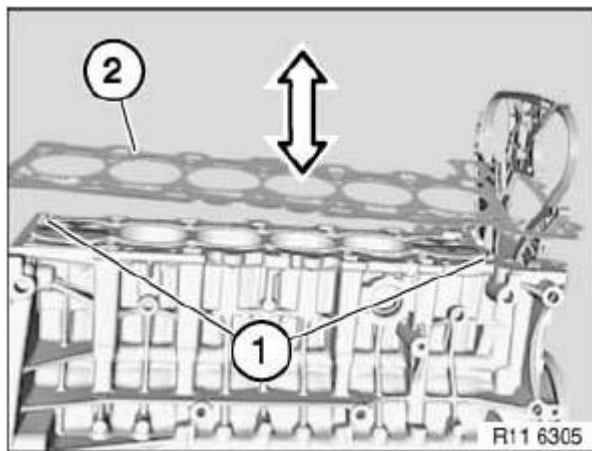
Identifying Head Gasket And Adapter Sleeves
